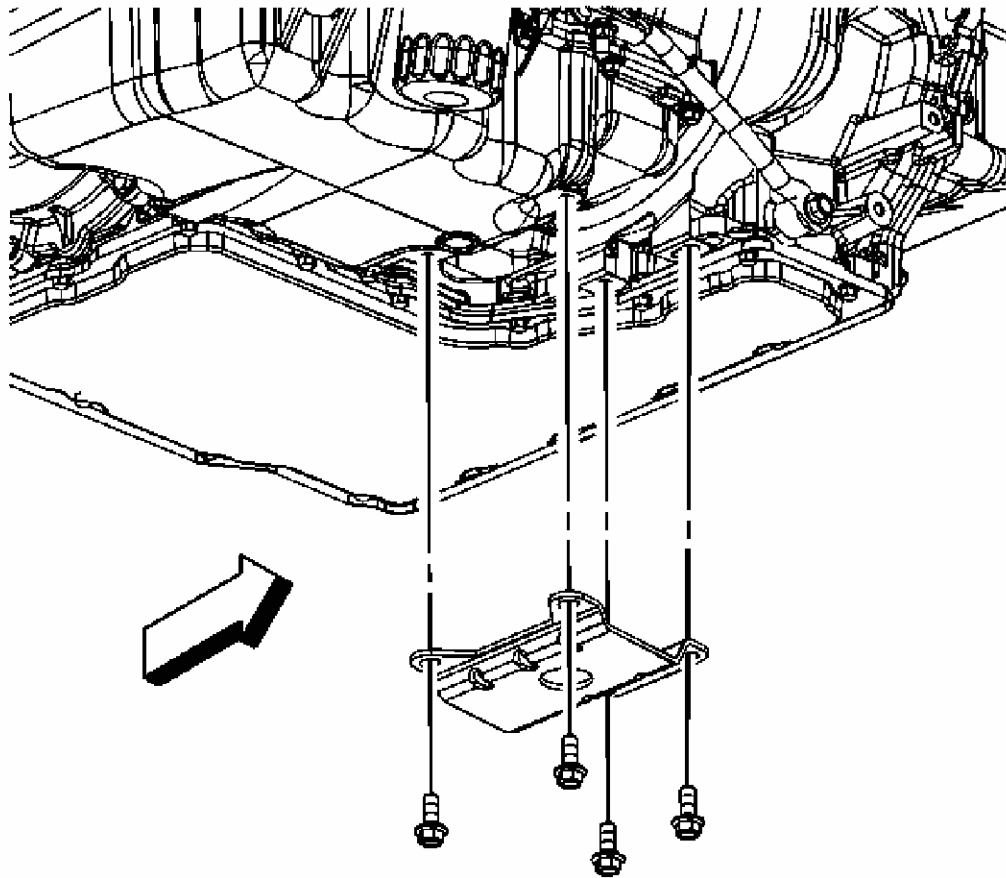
Identifying Transaxle To Engine Brace Bolts
